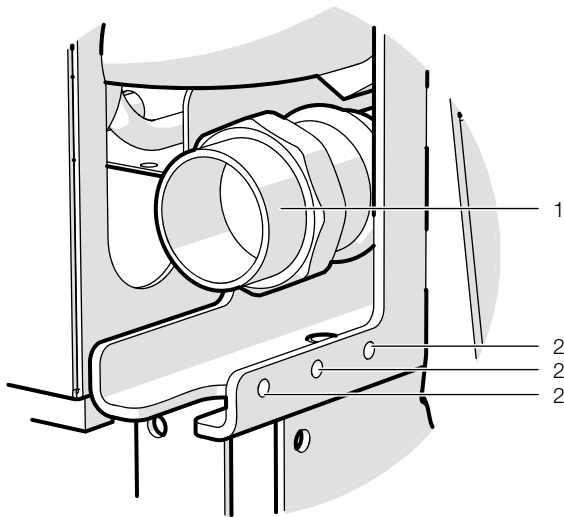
Fastening point of the assembly foot (unit lying flat)
